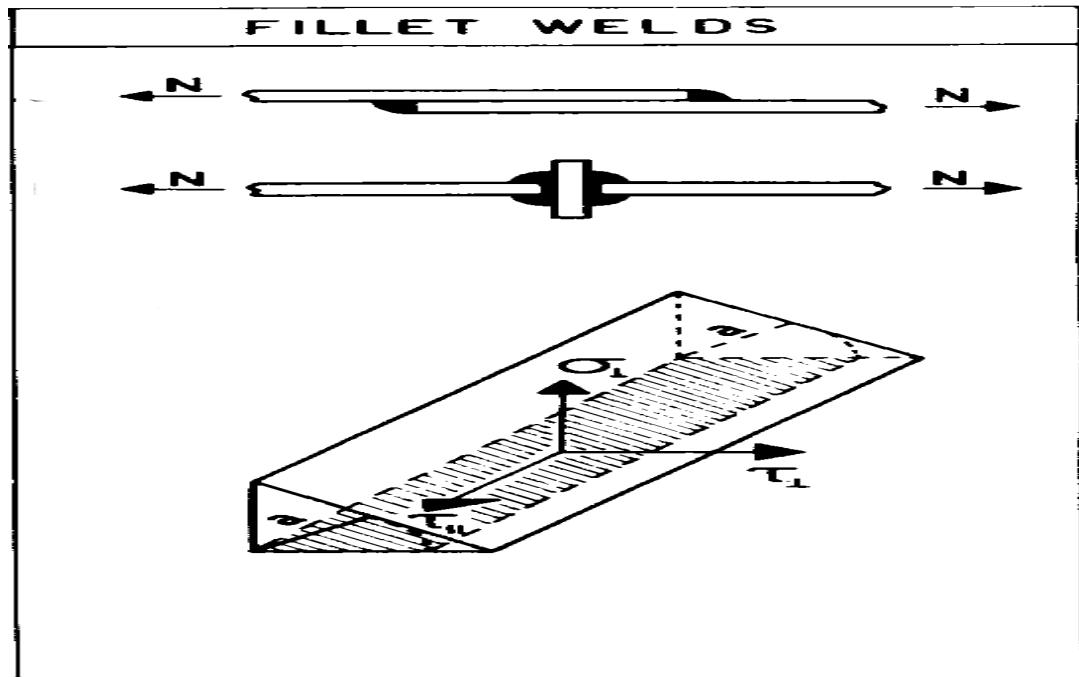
Strength of welded joint for fillet welds [6].
